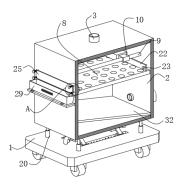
is the hydraulic master integrated valve body pouring device of the excavator, FIG.2 is its main section structure diagram, and FIG.3 is the enlarged diagram at A in FIG.2.Comprising
